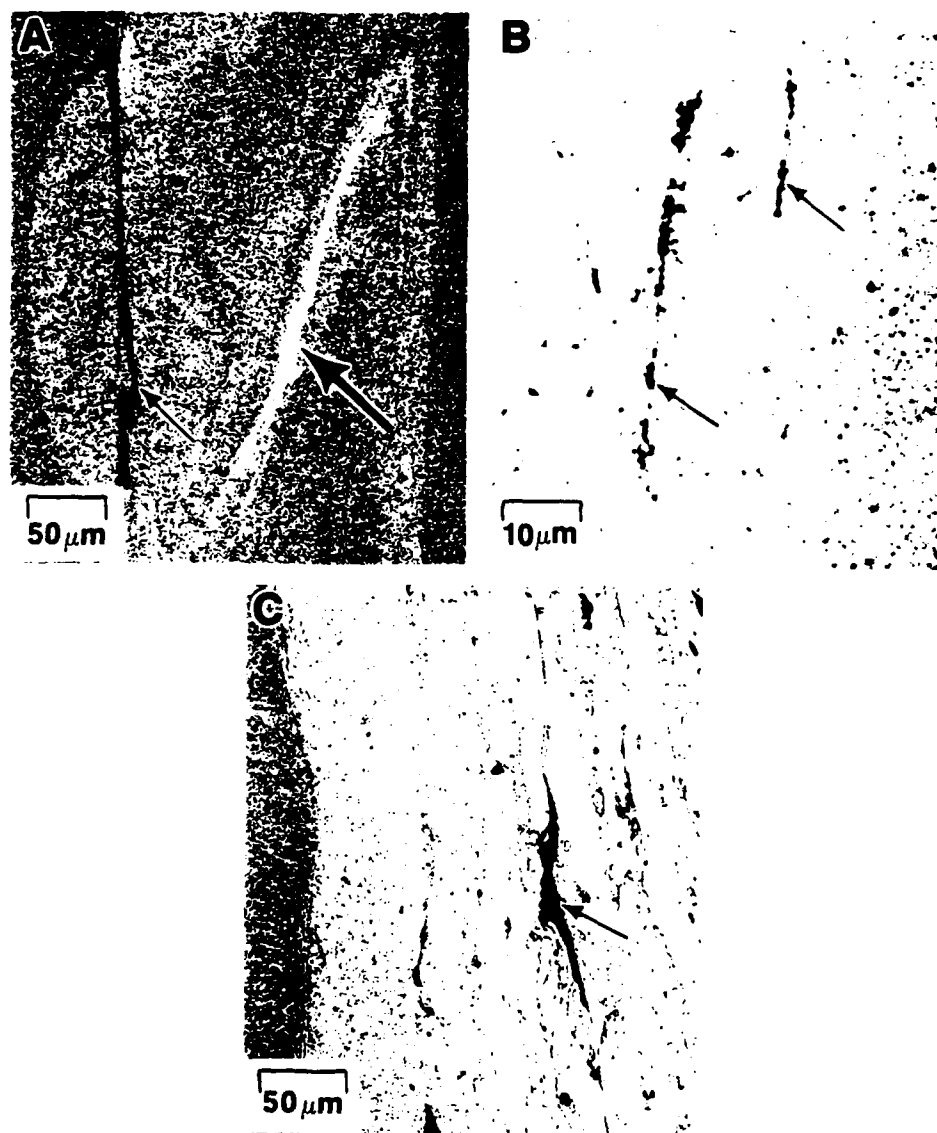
Defects in (A,B) Al-9Fe-7Ce low axial force weld and (C) Al-9Fe-4Ce /2024-T351 dissimilar alloy weld: (A) coarse, linear defect near outer periphery (etched); (B) fine, linear defect near weld centerline (unetched); (C) intergranular cracks adjacent to weld interface in 2024-T351. Small arrows indicate defects, large arrow in (A) indicates apparent Zone A solidification product.
